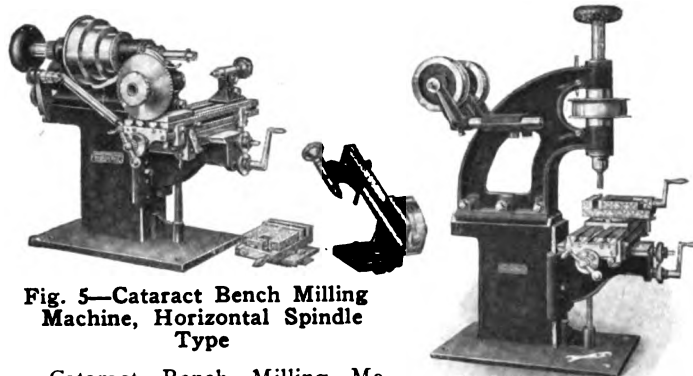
Cataract Bench Milling Machine, Horizontal Spindle Type
